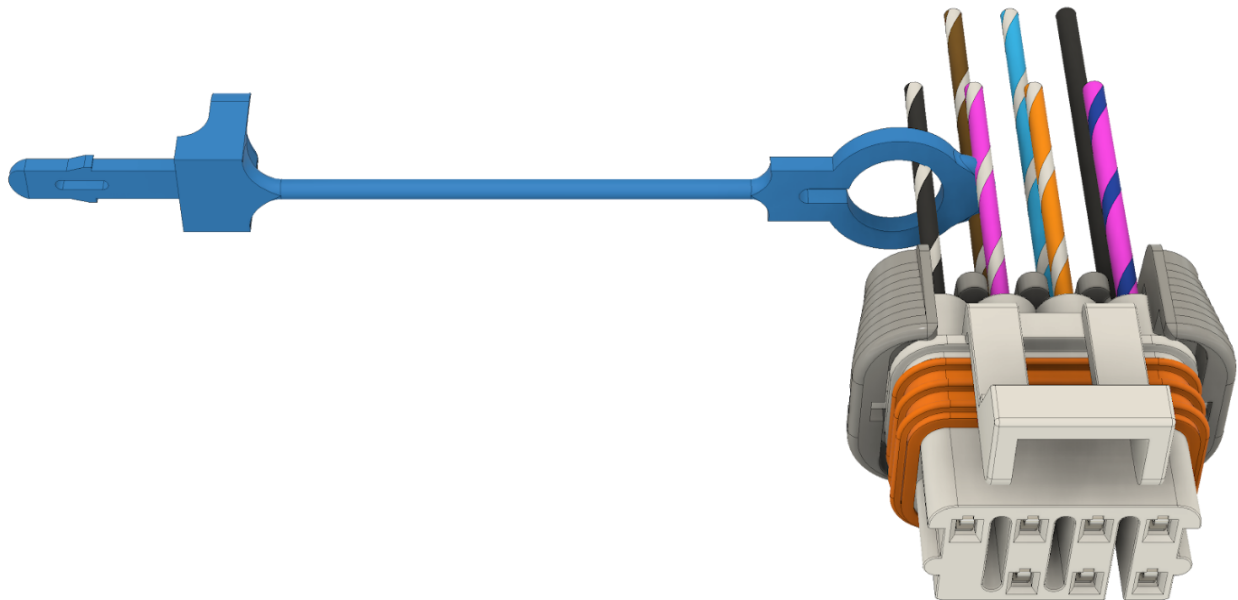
Ignition Coil Bank 1 DBC & DBW Connector View
